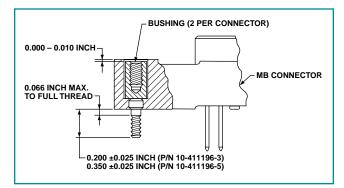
ASSEMBLY OF LOCKING/MOUNTING BUSHING INTO MB CONNECTOR
